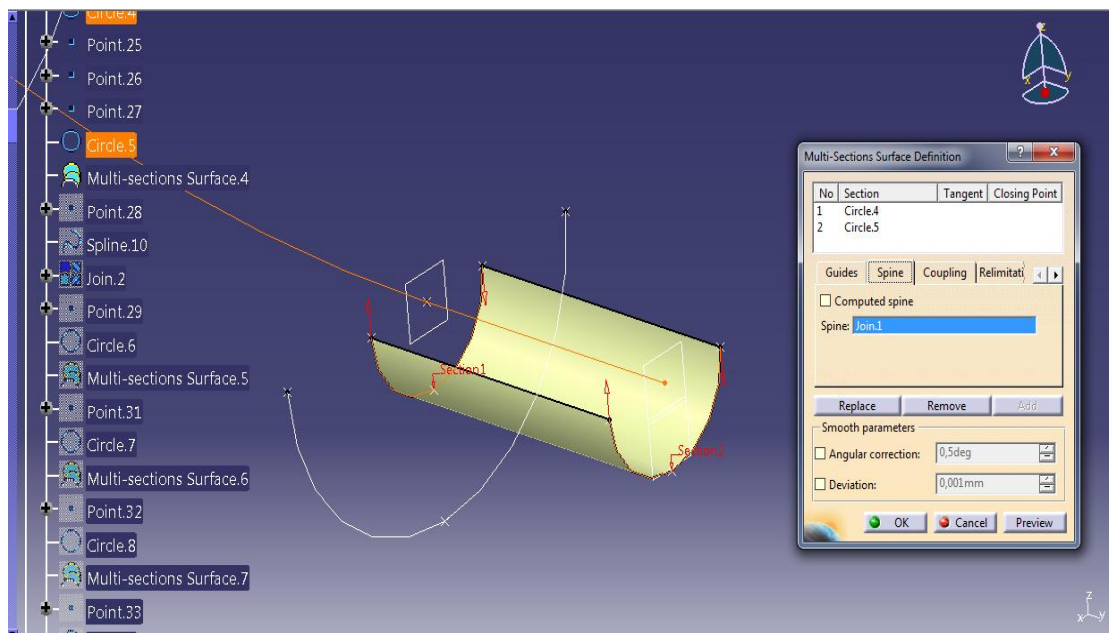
Initial multi-sections surface for the handle of the steering wheel.
